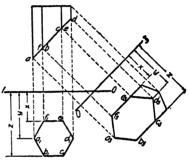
Auxiliary view on plane perpendicular to the horizontal plane.
